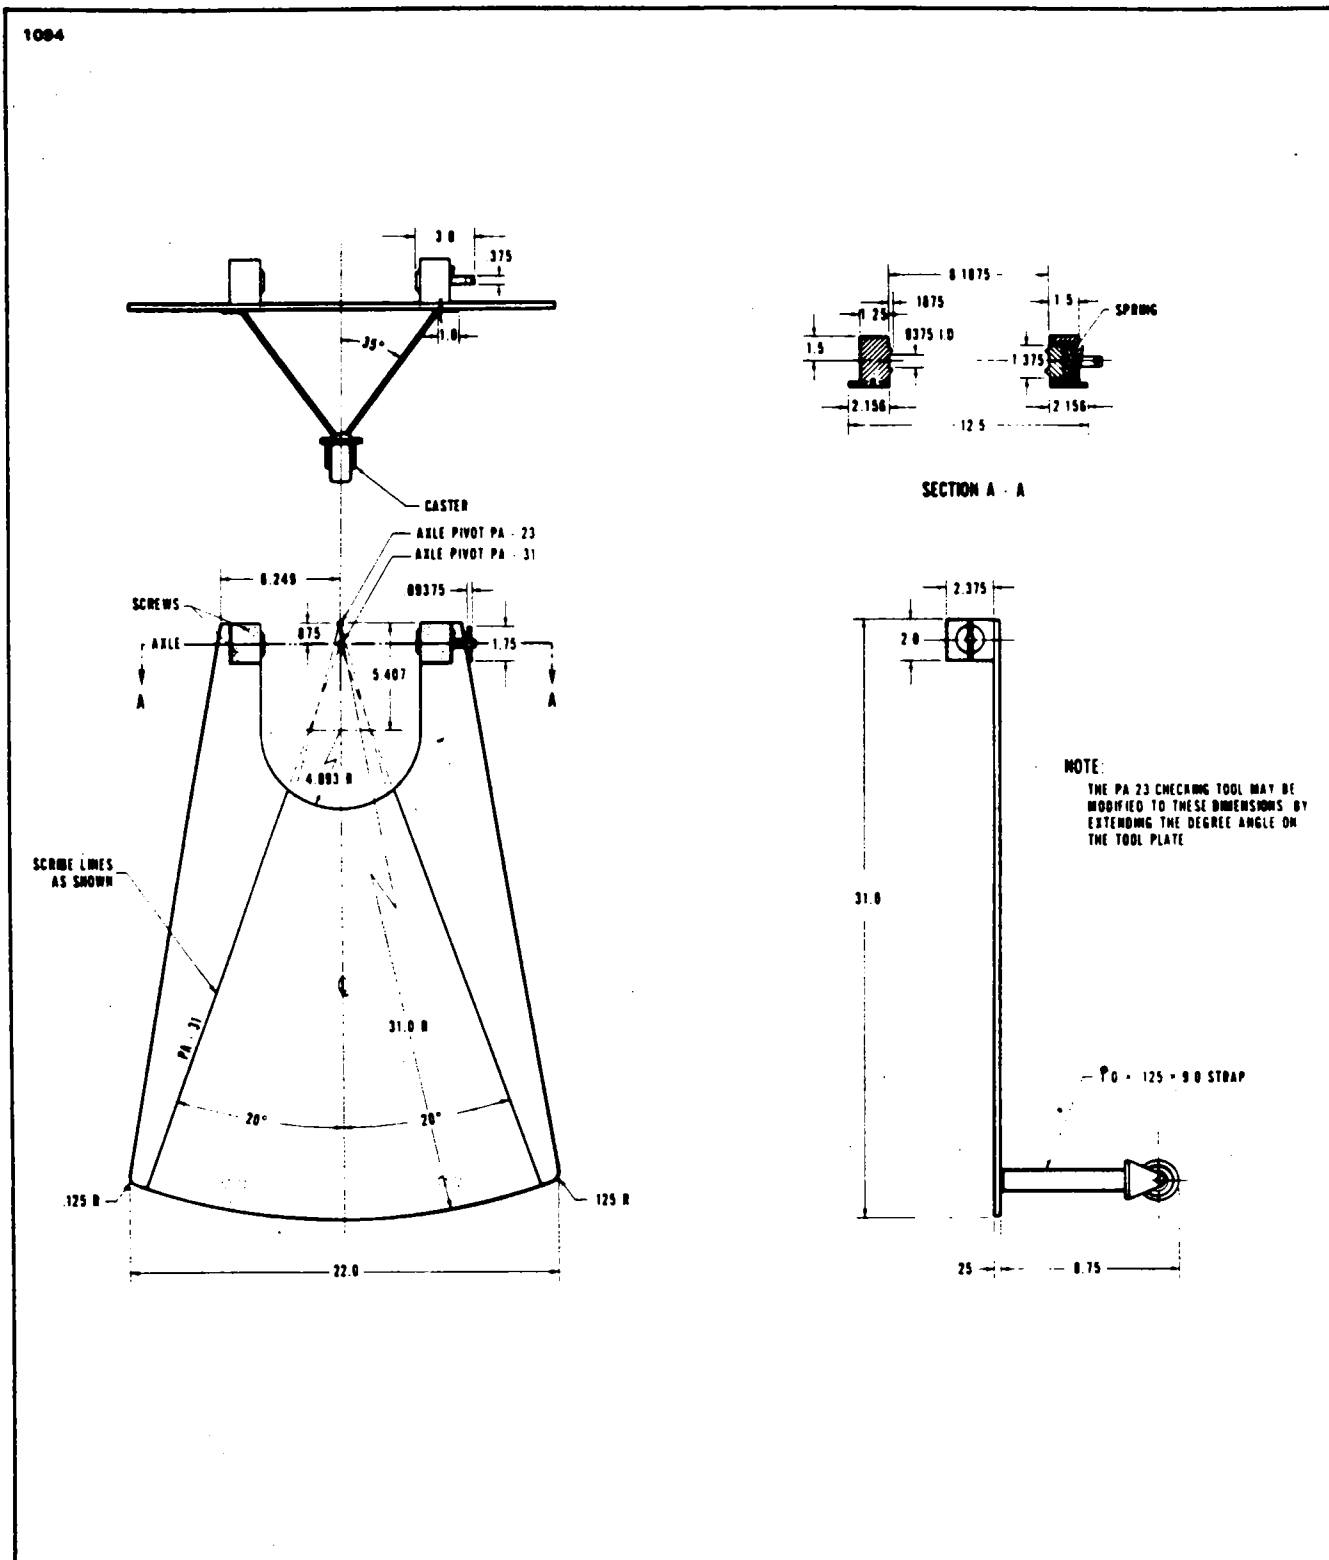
Fabricated Tool, Checking Nose Wheel Alignment
